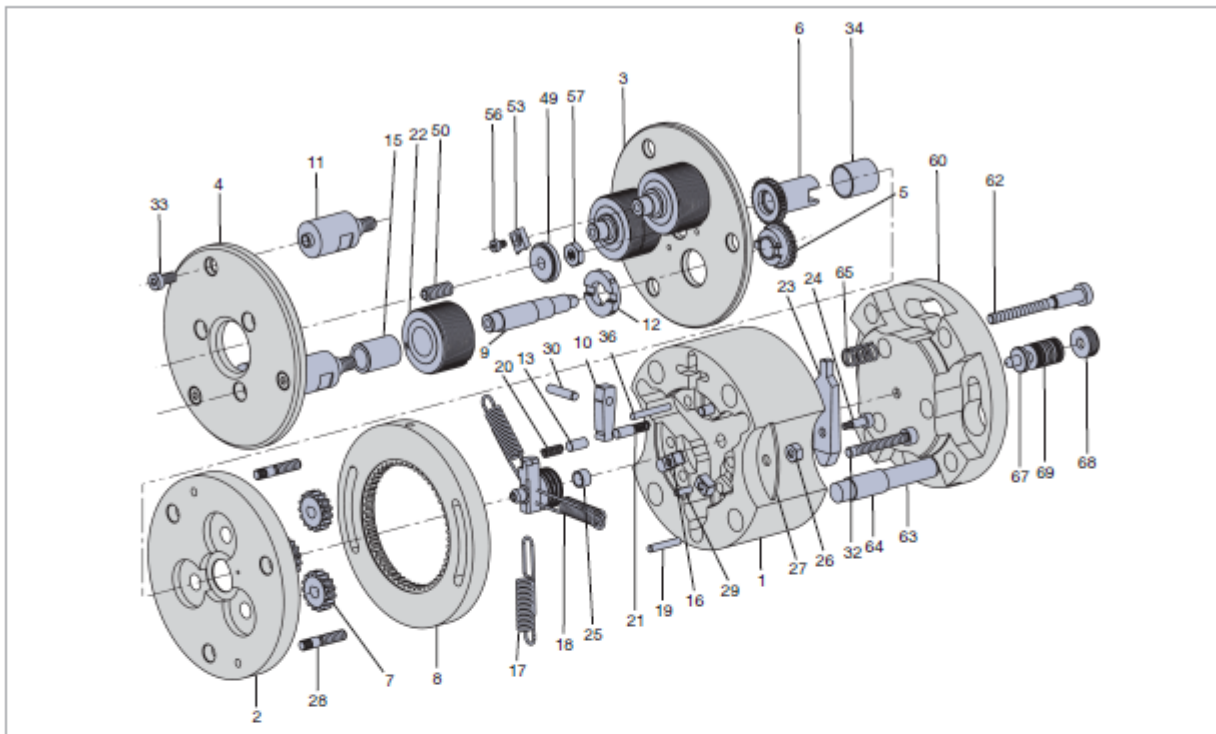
Exploded view, spare parts EW13A00 and EW13A01
